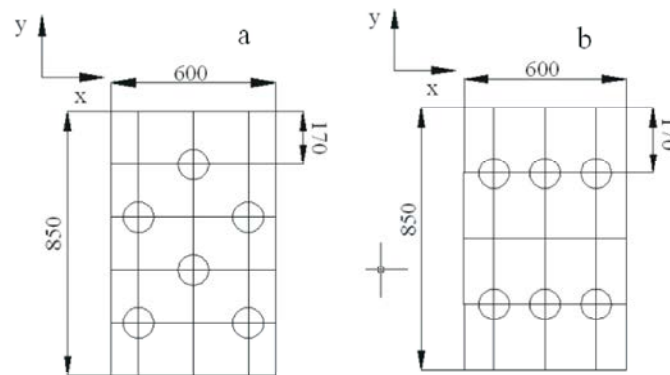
Nozzle arrangement a. Triangle arrangement, b. Rectangle arrangement
